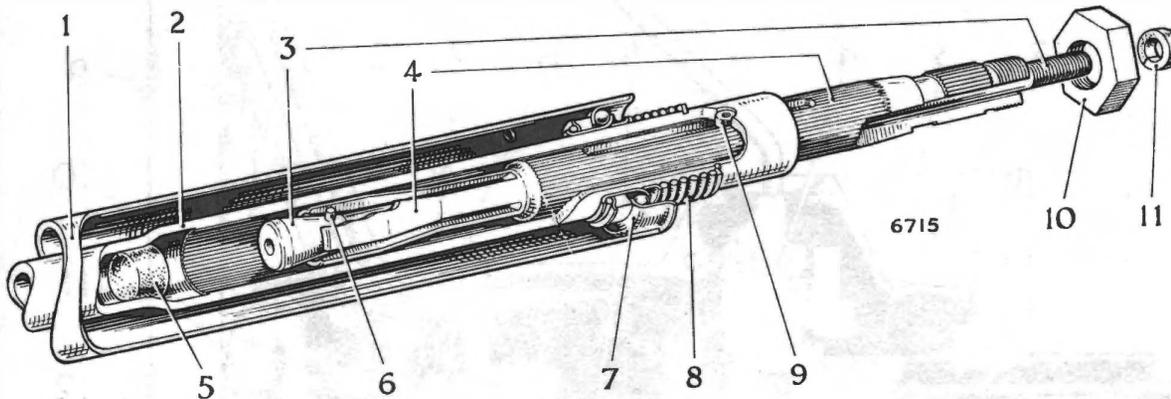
The upper portion of the telescopic steering unit in cut away section.
